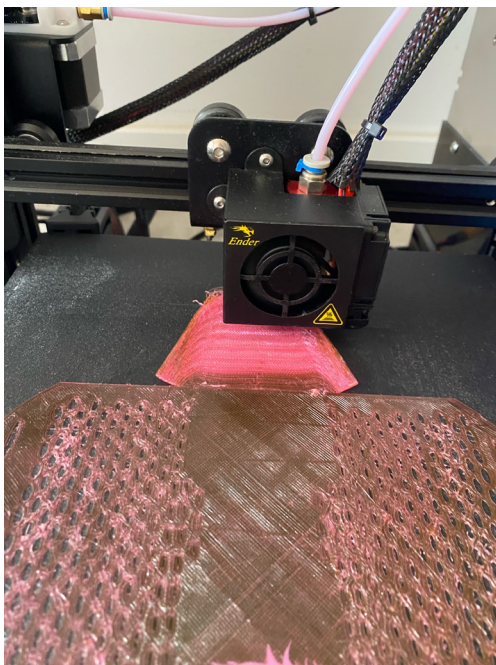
3D Creality Ender 3 Pro printing machine. Printing the outer shoe.
